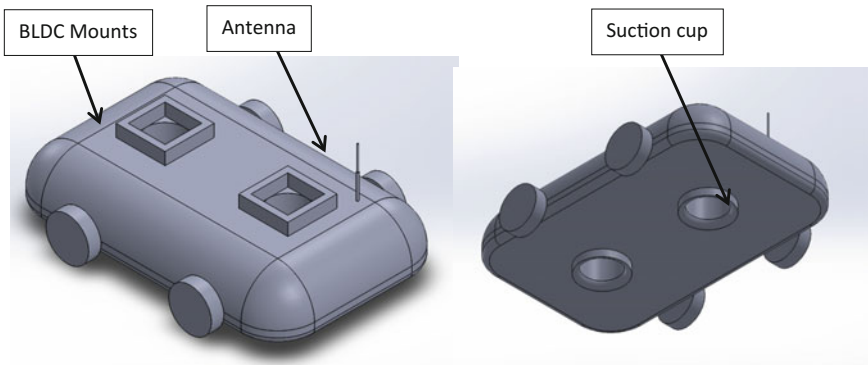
Perspective view from top and bottom of the mobile robot unit
